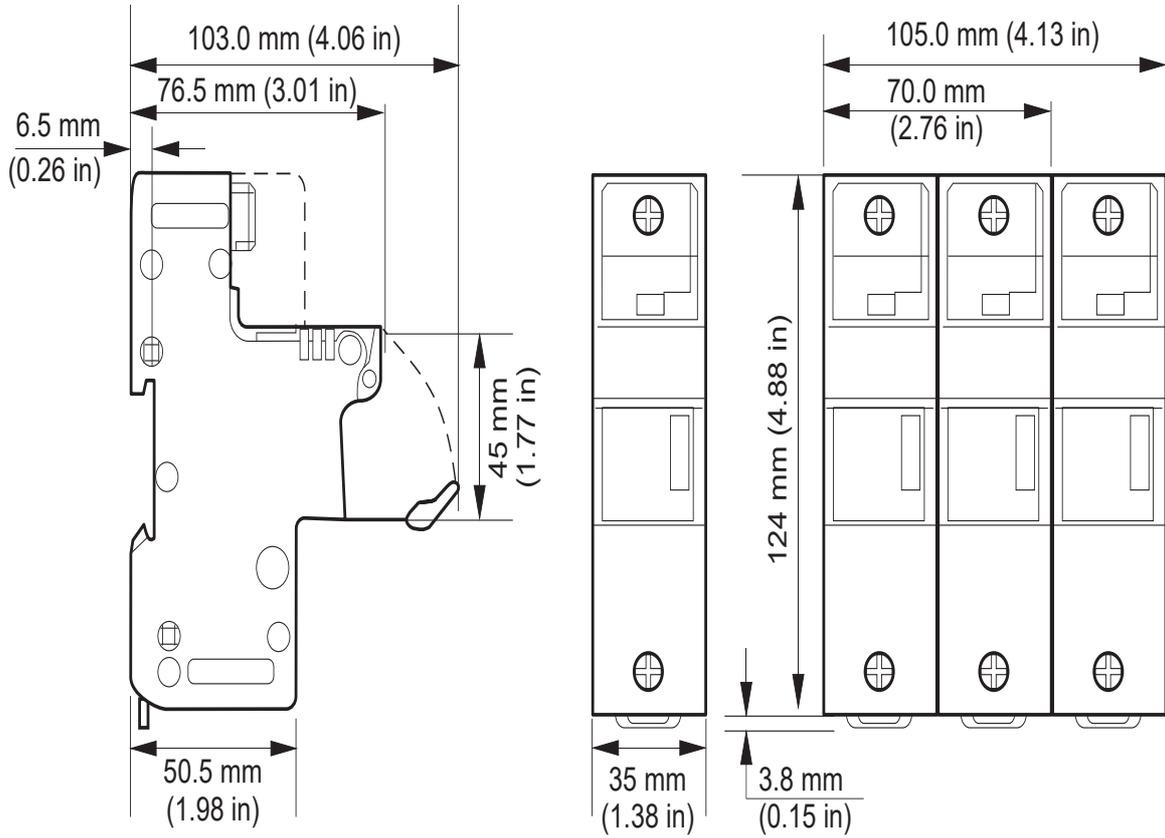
Fuse holder dimensions: US221 (22x58mm)
